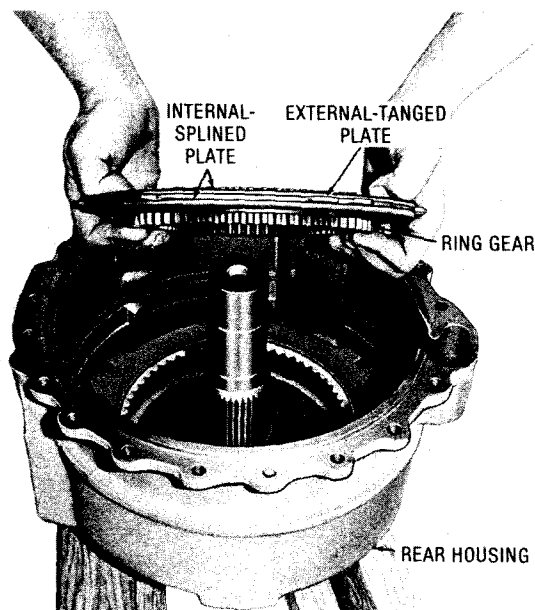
Removing rear housing and attached parts (TRT 2221-3, 2421-3 with overdrive)
